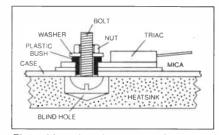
Mounting the power triac on the metal case using a TO220 mounting kit.
